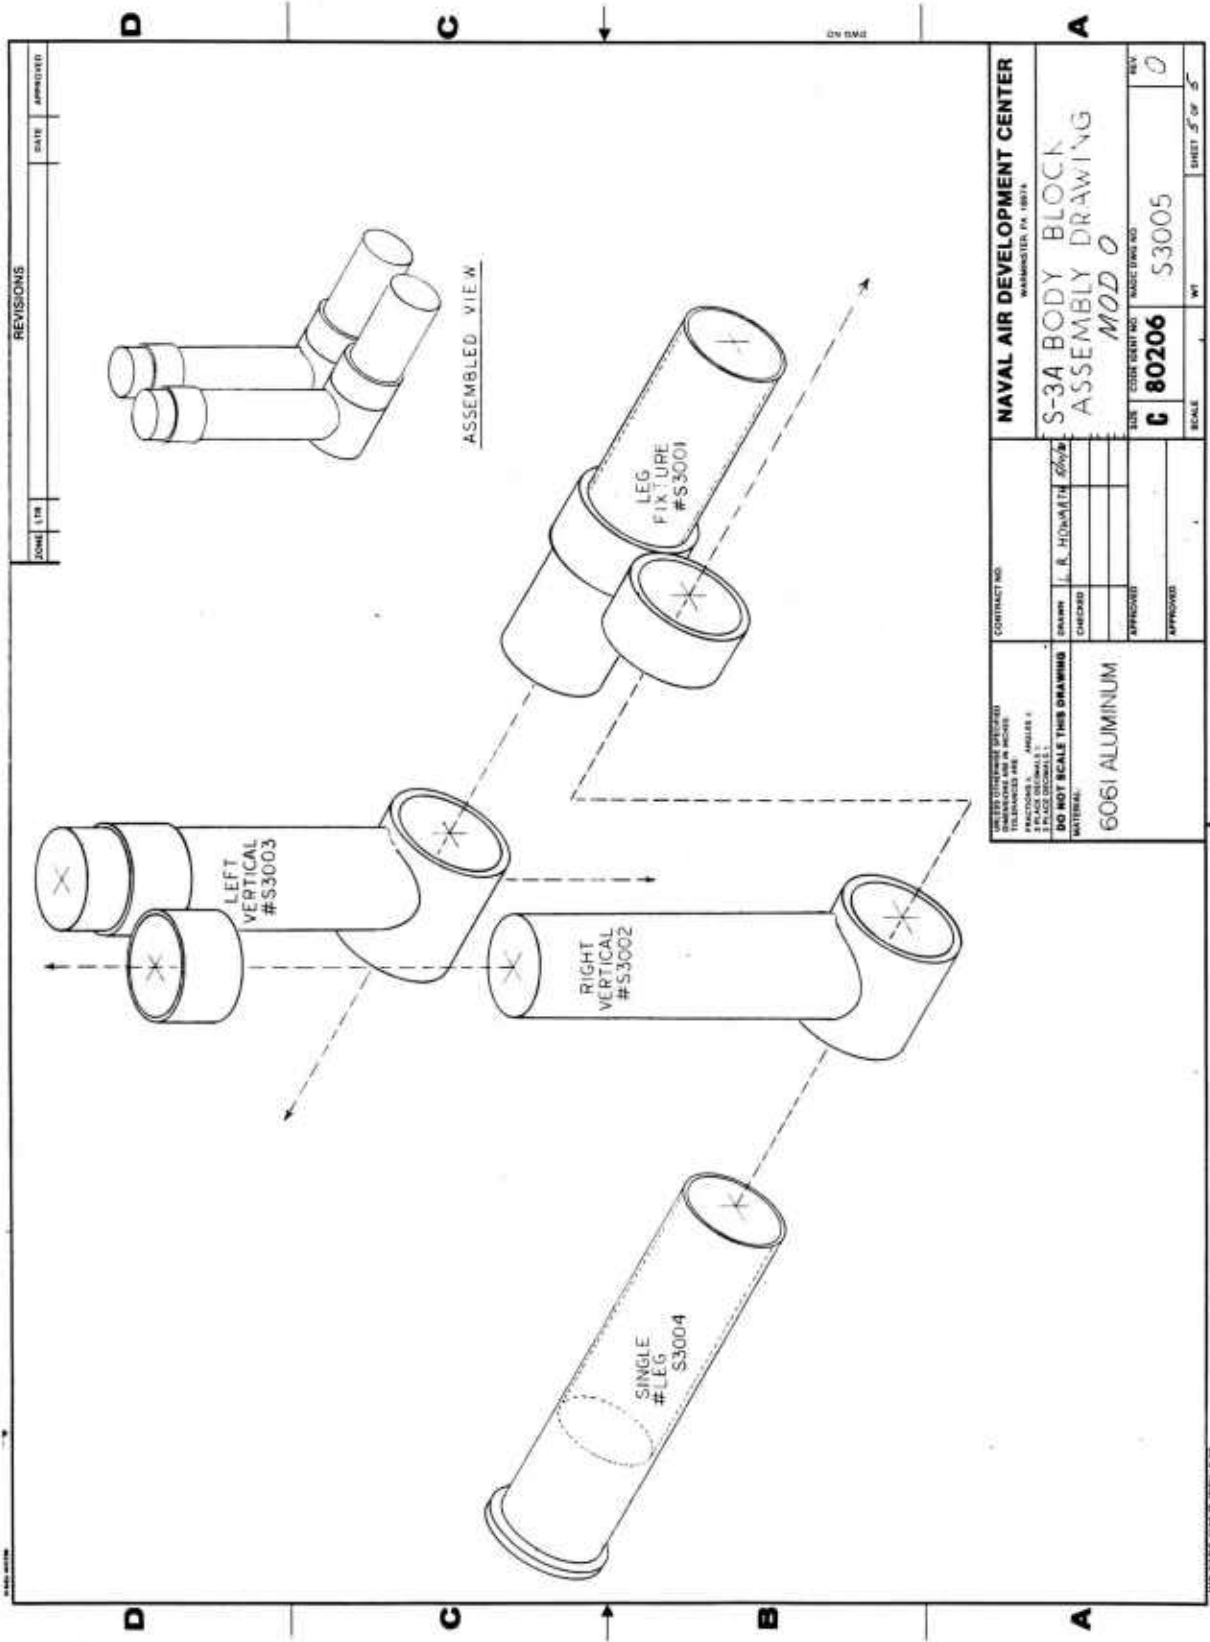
S-3A Body Block Assembly Drawing Mod 0
